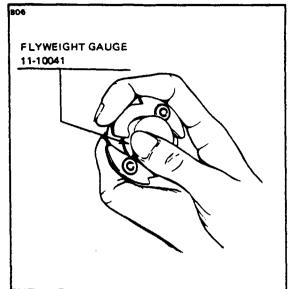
Checking Flyweight Radial Wear with Gauge
